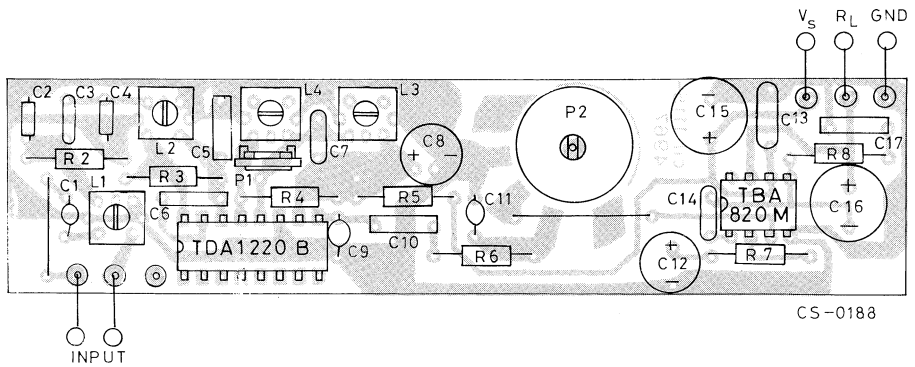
P.C. board and component layout of the circuit of fig. 18
